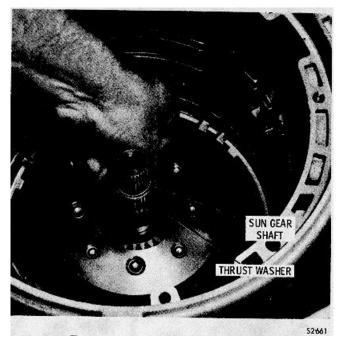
Installing sun gear shaft assembly and thrust washer
